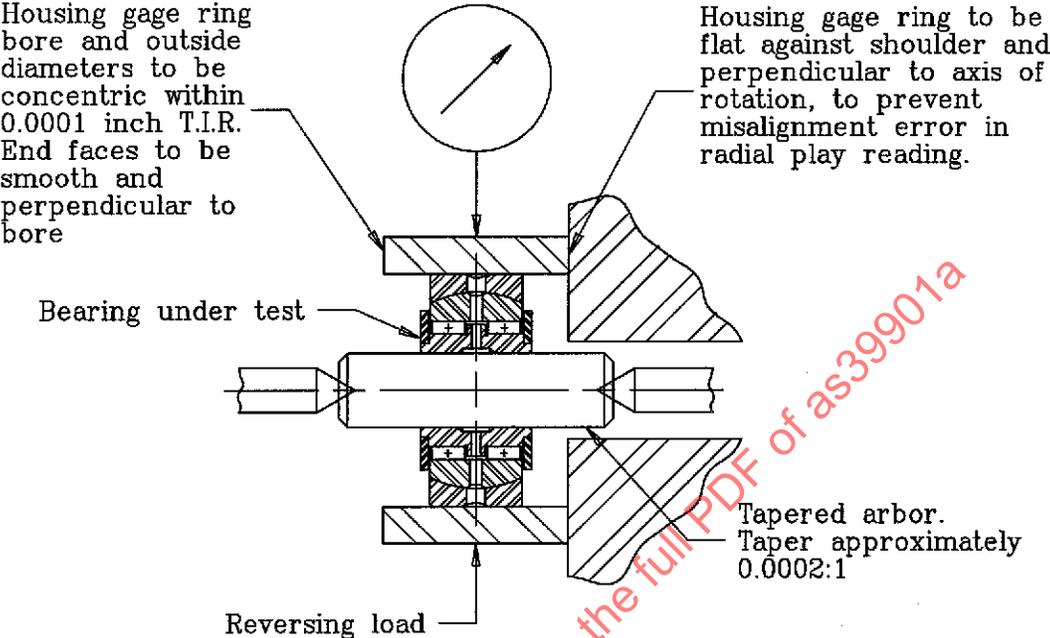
B - Radial Internal Clearance Test for Type III and IV Bearings
